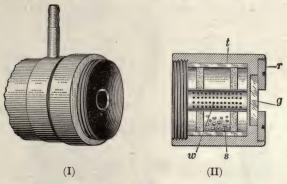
(I) Threaded cap of polariscope tube. (II) Dessicating cap which screws on over threads of (I); t, removable glass tube containing dessicating substance s; w, inner perforated metal tube; g, cover glass held in position by threaded disk r; the disk is unscrewed by inserting a spanner in the two holes marked in black.
